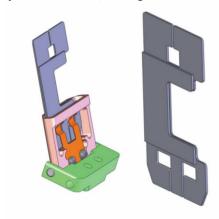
Stripper foil mounting frame (right) and frame holder that attaches to chain.
